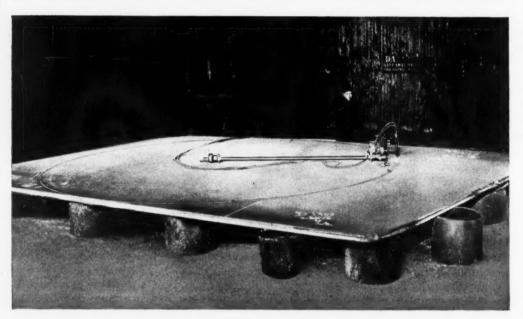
Flame-cutting a Large Disk from a Heavy Steel Plate for Subsequent Spinning into a Pressure Head
